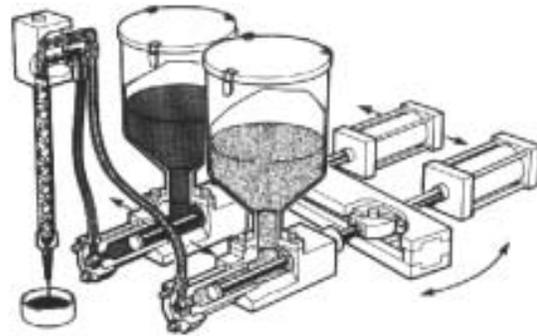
Metering and mixing machine for two-part epoxy adhesives
